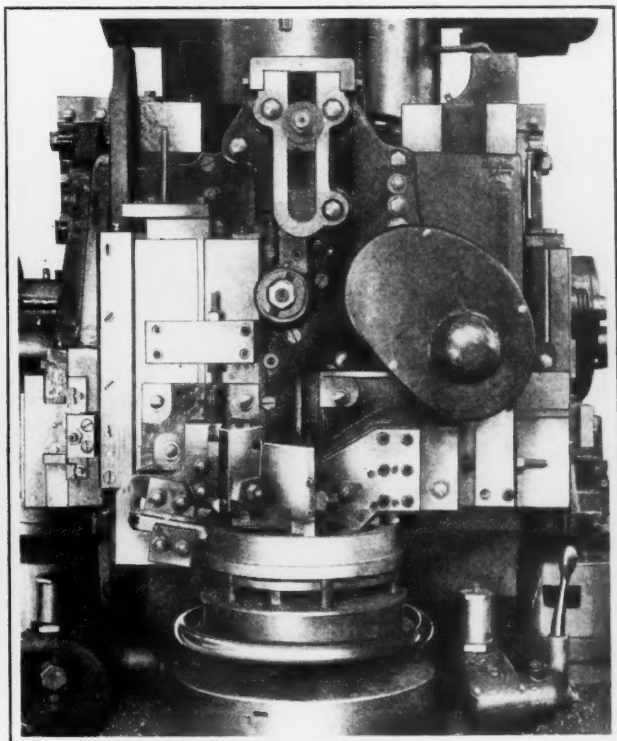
Fourth Unit of the Continuous Machine—finishing the Clutch Side
